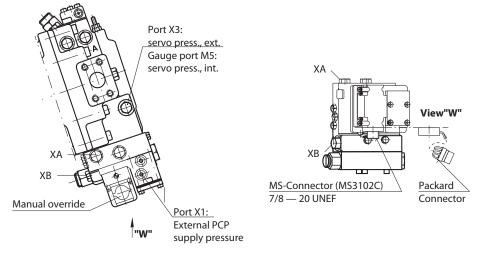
Gauge Ports, Motor with EP•EQ Control
